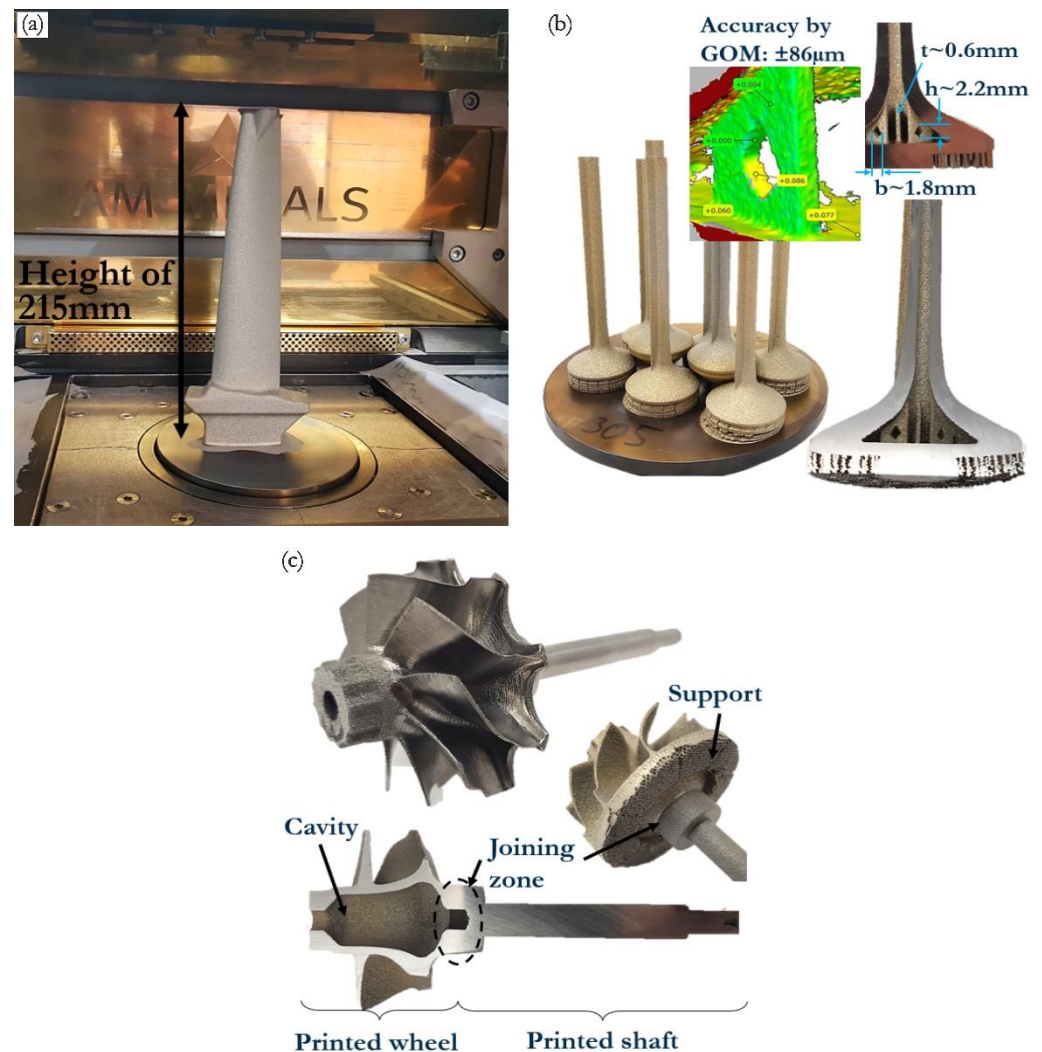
(a) Demonstrator aero engine LPT blade made from TNM alloy powder in the process chamber of an EOS-M290-HT LPBF machine; (b) base plate with eight fabricated TNM outlet valves in a solid or hollow version along with descriptions of geometrical features. The head of the valve has a diameter of $\sim 30 \text{ mm}$ and the stem exhibits an outer diameter of 5.5 mm and a length of 90 mm ; (c) exemplary turbocharger turbine wheel, which was directly printed on the shaft using hybrid manufacturing technology with a cavity in the wheel as can be seen in the cross-sectional cut. The diameter of the wheel is $\sim 40 \text{ mm}$ and the shaft length is $\sim 80 \text{ mm}$.
